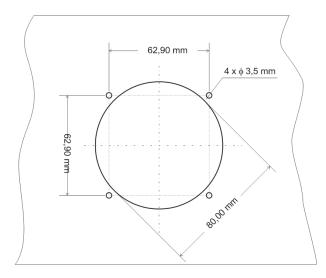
Mounting hole and screw holes measurements (not to scale)
